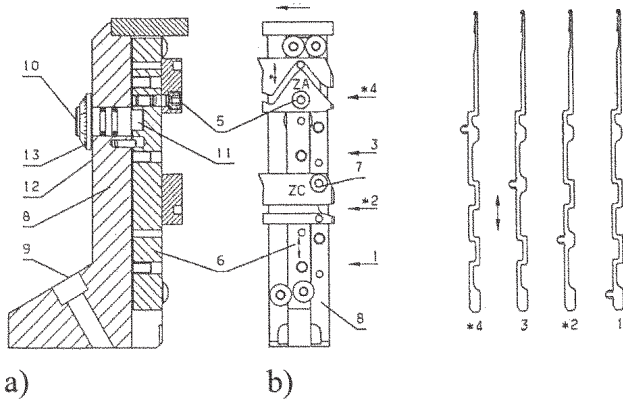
Cylinder camming at OV3.2 circular machine with large diameter a) section view b) interior view
